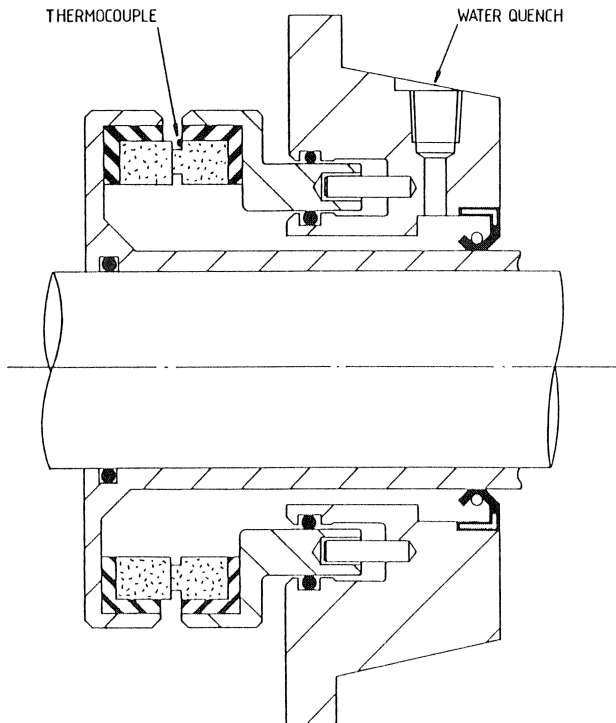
Slurry Seal with Auxiliary Quench Seal.
